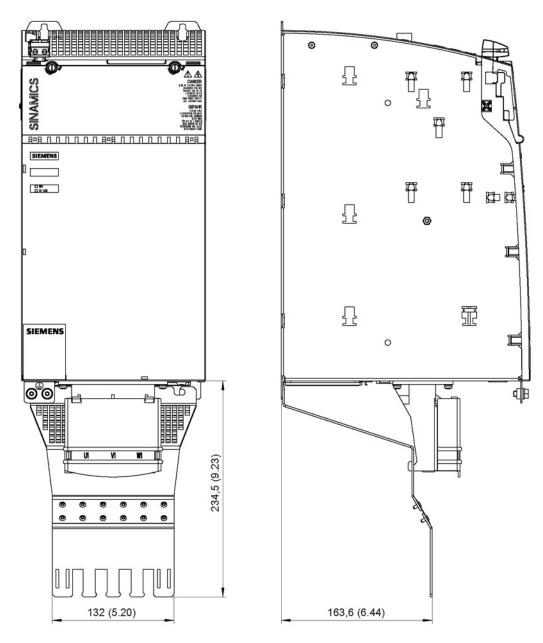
Dimension drawing of shield connecting plate on a 200 mm component with internal air cooling, all dimensions in mm and (inches)
